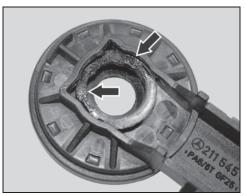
P-B-54.18/108 Arrows pitting on bottom part (flange) of front prefuse box cap (F32).
